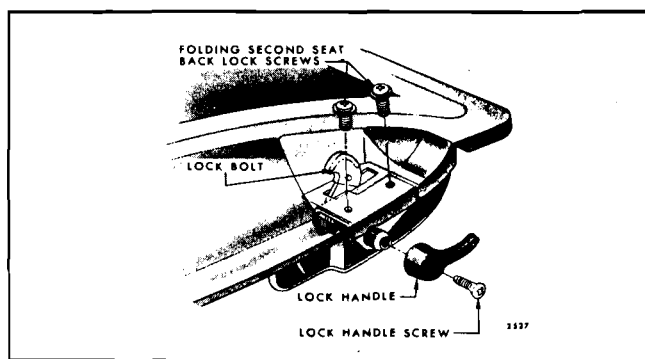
Folding Second Seat Back Lock Installation - All "A & B" Station Wagons (Except Vista Cruiser and Sport Wagon Styles)
